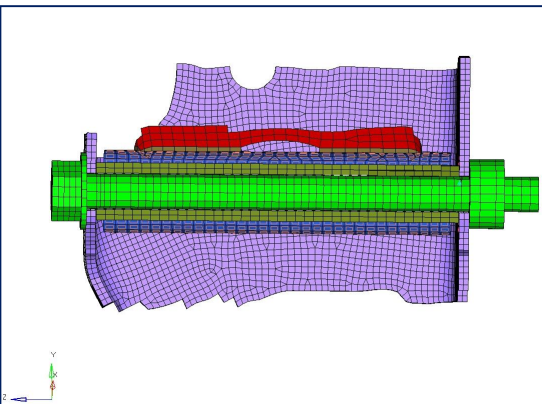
FE modeling cross section of the Bolt joint with Solid elements
